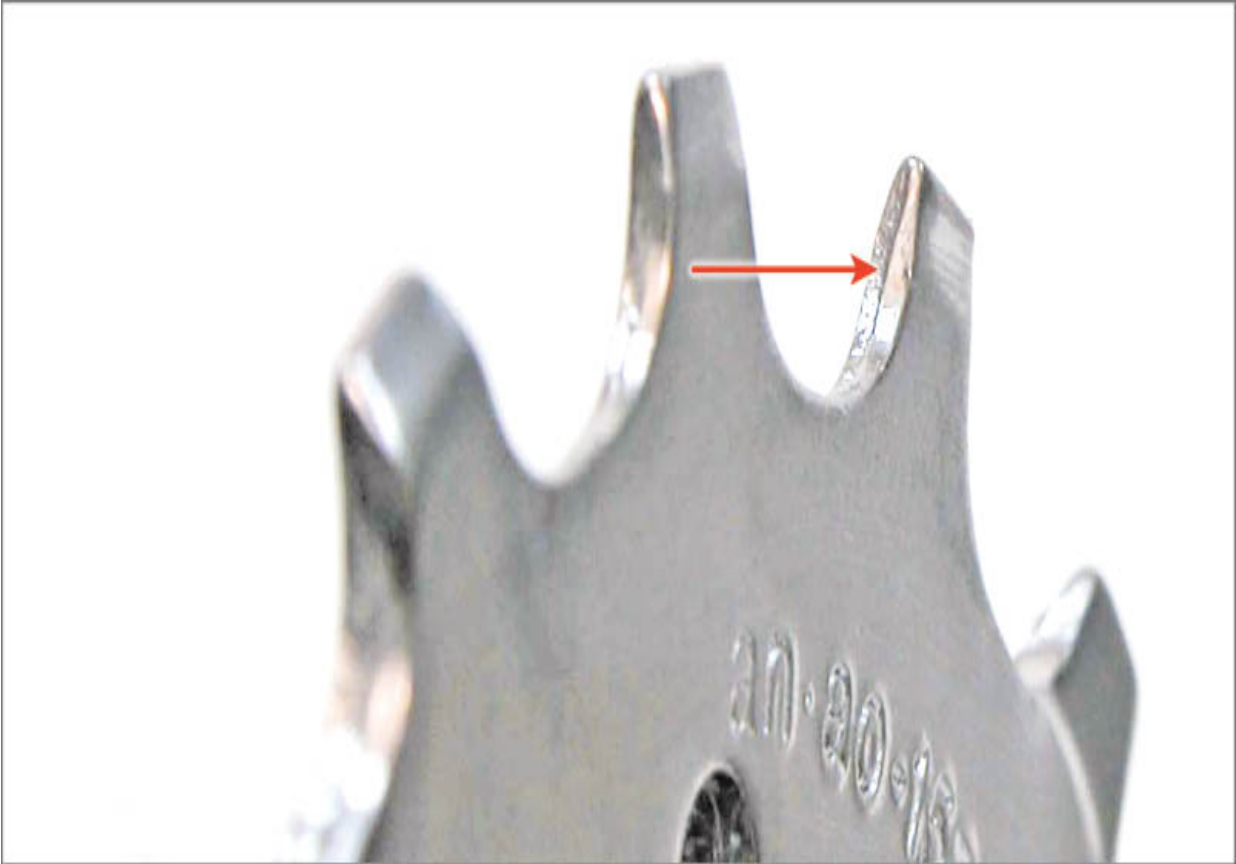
Sprocket showing signs of original stamping marks indicating very little wear
